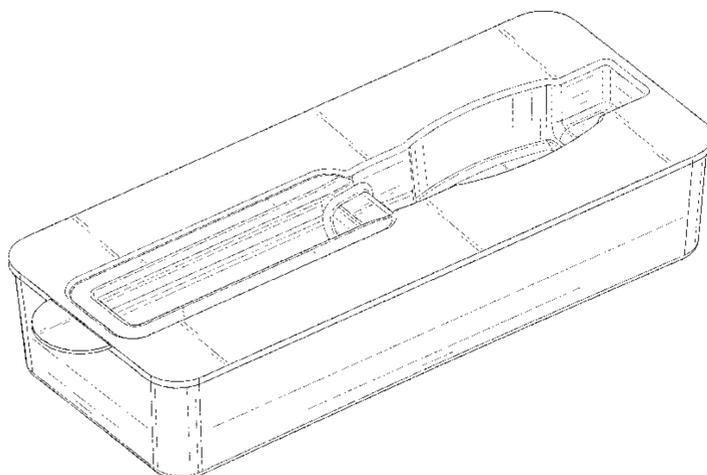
is a bottom perspective view of the lower member of the dual packaging tray rotated 180 degrees relative to FIG. 13;
